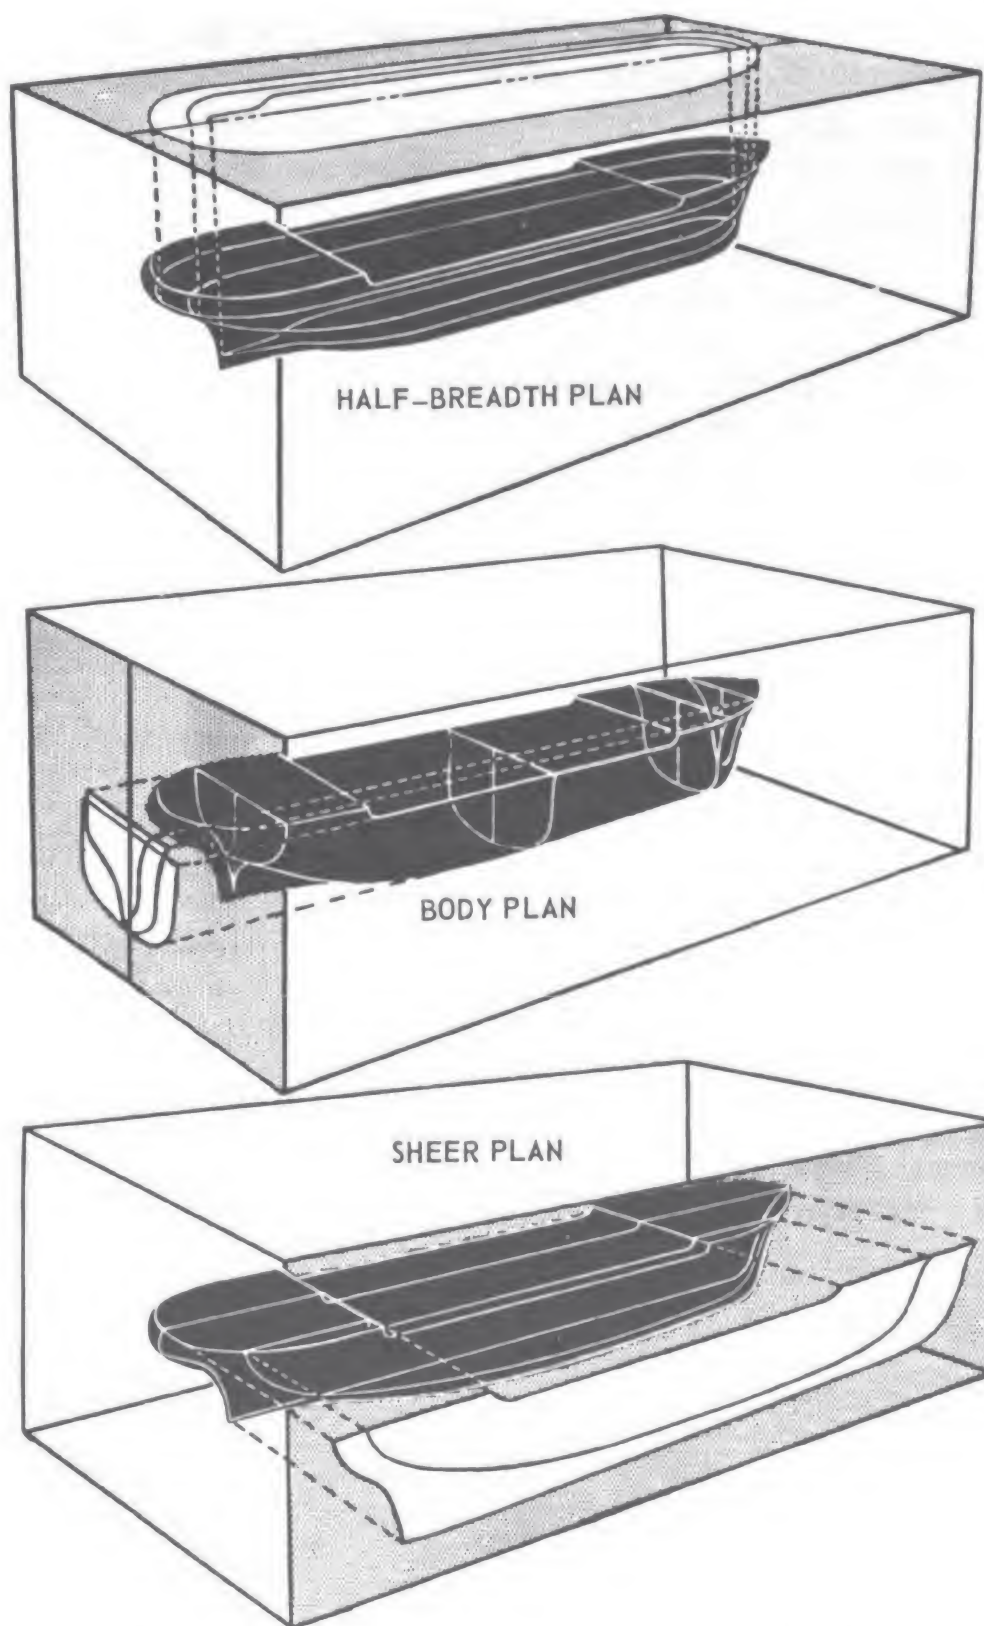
Projection of half-breadth plan, body plan, and sheer plan.
